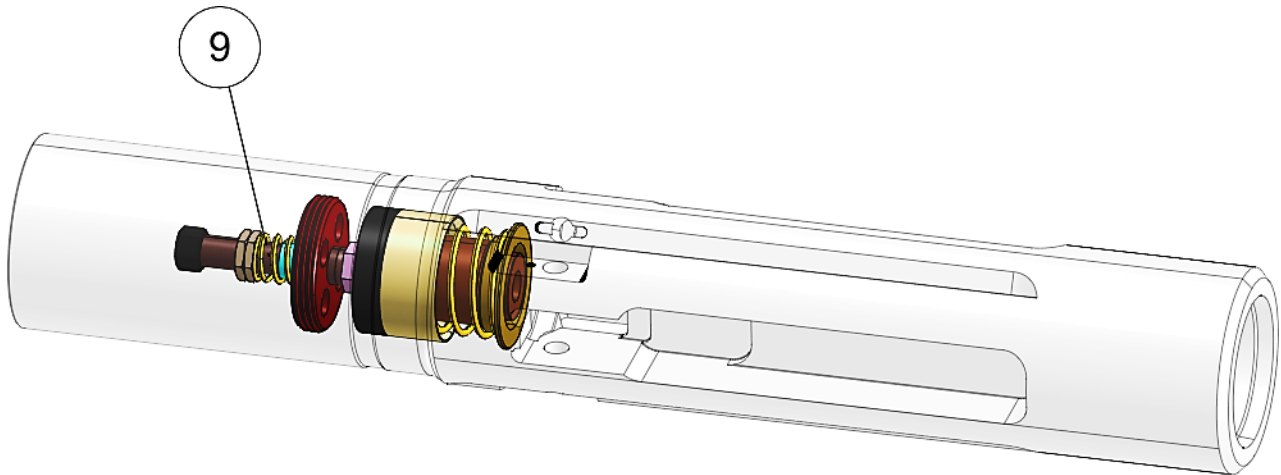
Indicator Assembly in Cutter Body (Shown Transparent)
